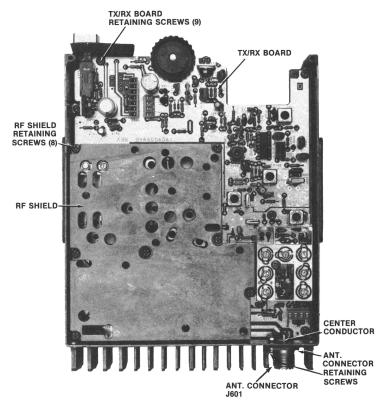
TRANSMIT/RECEIVE BOARD REMOVAL
